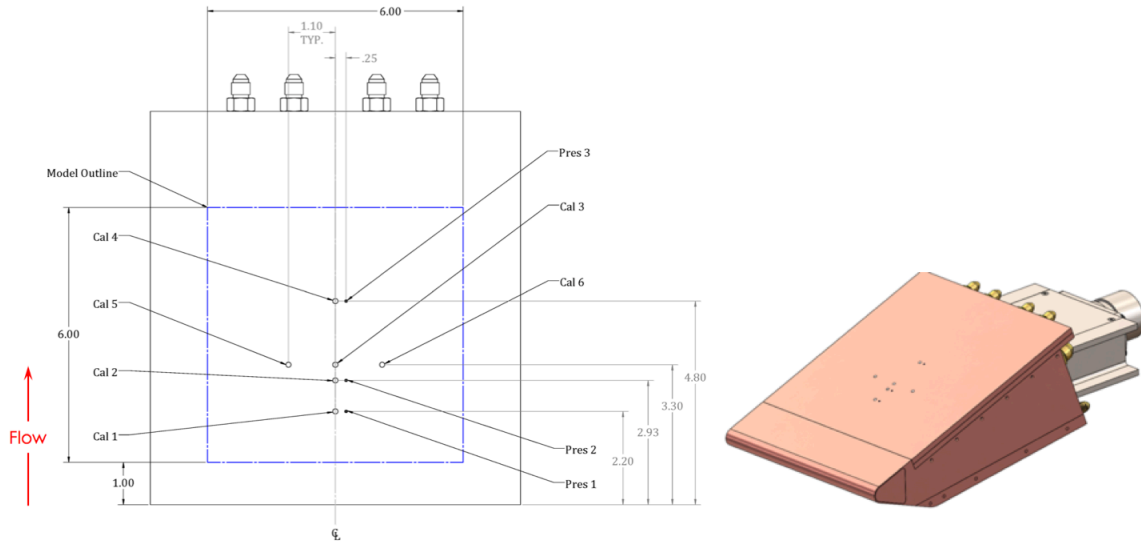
On left, water-cooled calibration plate drawing with dimensions in inches. Location of Gardon gages denoted by Cal, pressure transducers denoted by Pres, and laser beam target area outlined in blue. On right, assembly drawing of plate mounted onto a water-cooled wedge holder. Note that the radiative calibration plate was not instrumented with pressure sensors while the convective calibration plate did include pressure sensors.
